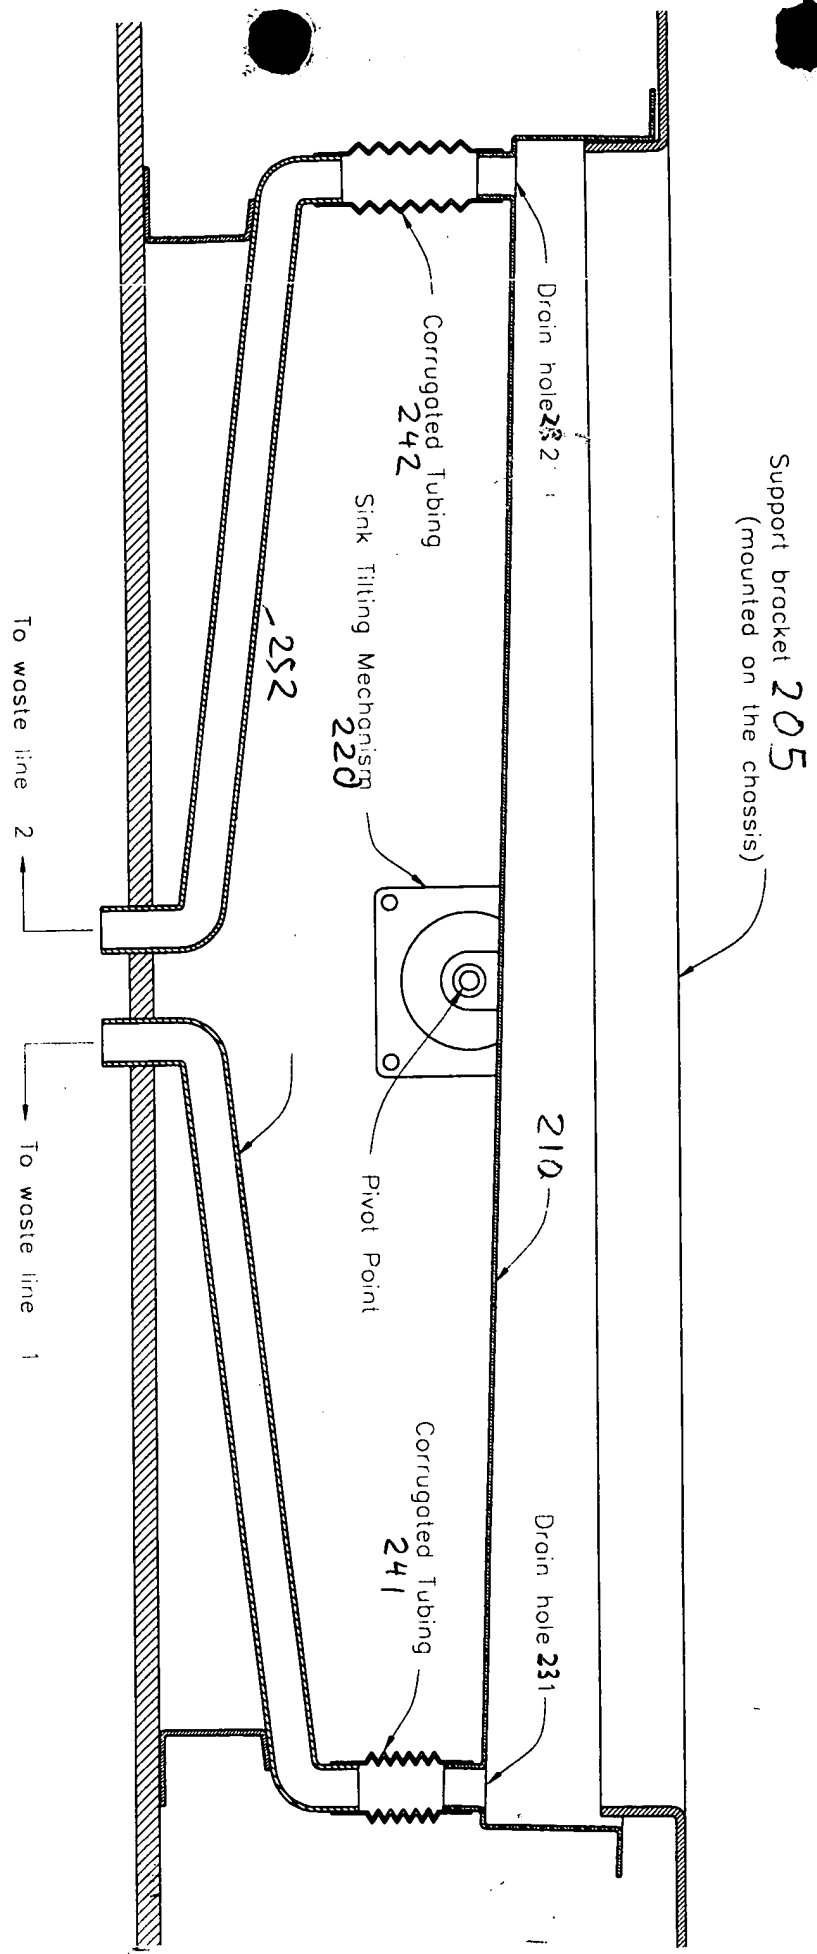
A is a perspective view of a sink drain assembly in accordance with the present invention. The assembly includes a support bracket 205 mounted on a chassis. A sink tilting mechanism 220 is connected to the support bracket 205 and includes a pivot point 210. Two drain holes 231 and 232 are formed in the sink. Corrugated tubing 241 and 242 connect the drain holes 231 and 232 to waste lines 1 and 2, respectively. The entire assembly is designated by the reference numeral 252.
